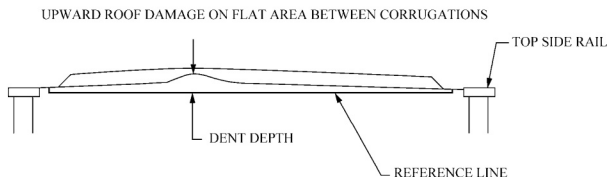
Measuring upward damage on roof: flat area between corrugations
